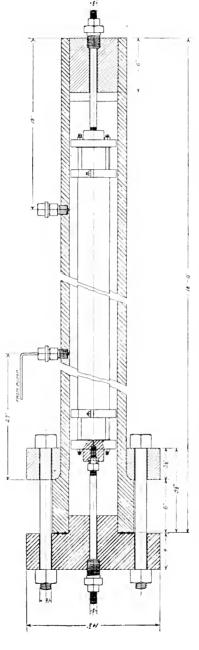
SECTION OF NICKEL STEEL CYLINDER, WITH TUBE TO HE TESTED IN PLACE. SHOWING END PLUGS AND CONNECTION TO PUMP
